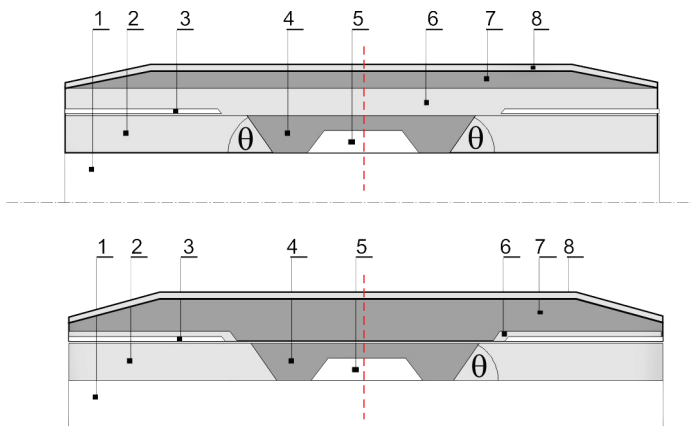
Medium voltage cable joint constructions: CJ1 - upper, CJ2 - lower.
